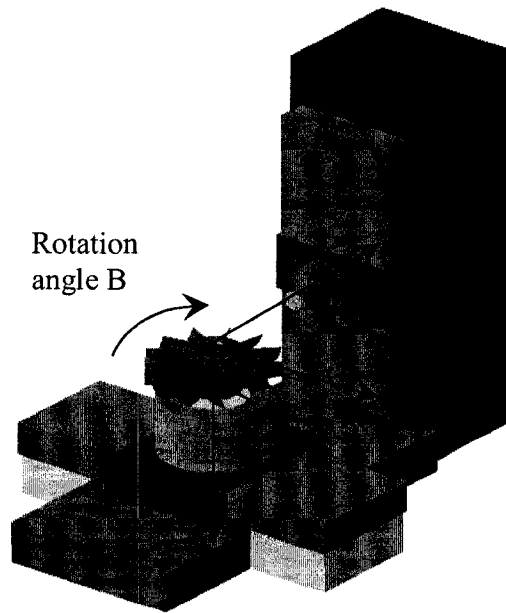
Example of an axial-flow compressor, which is set up in 4-axis CNC machining
